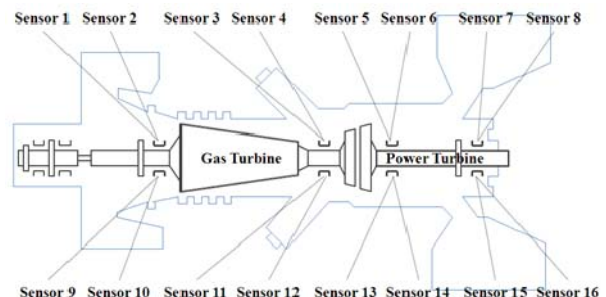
Bearing vibration and bearing temperature sensor locations on an industrial turbine system
